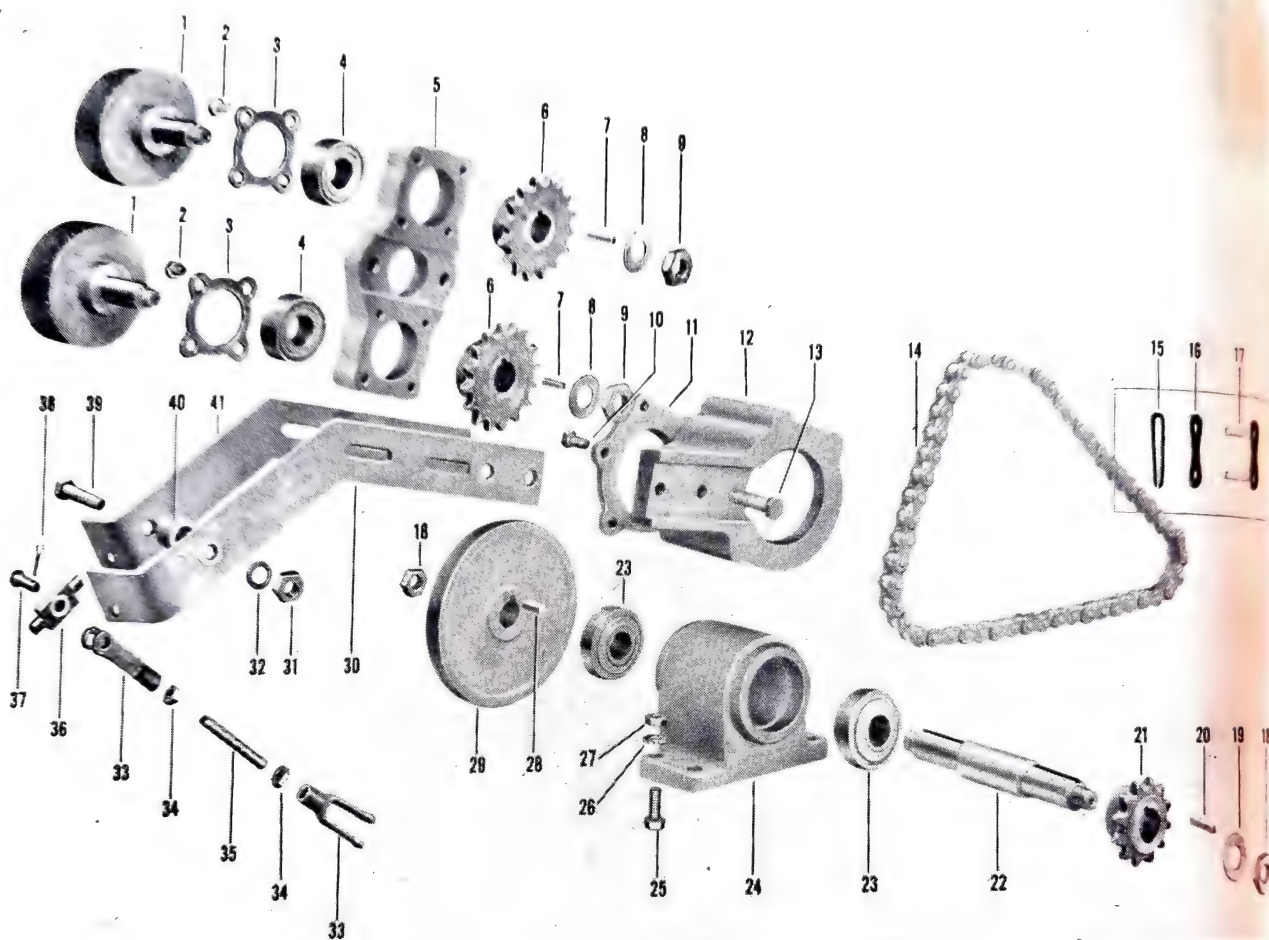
Friction wheel sprocket and power tilt drive chain removed.
